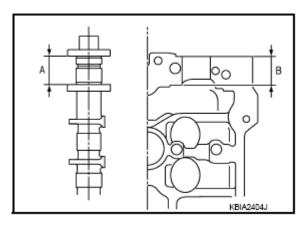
Identifying Camshaft Journal Dimensions Courtesy of NISSAN NORTH AMERICA, INC.
